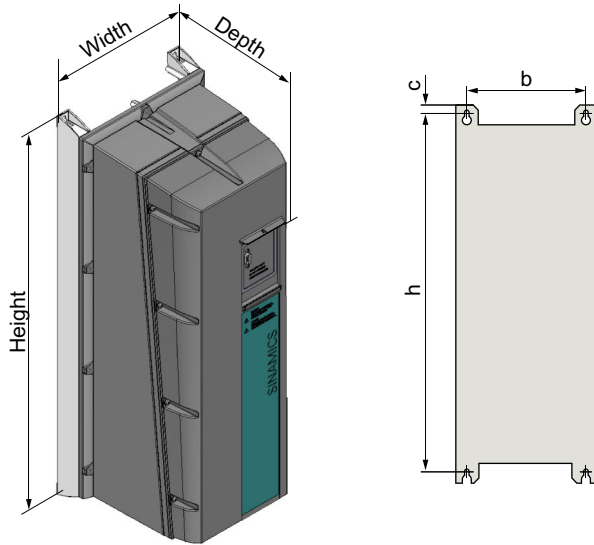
Dimension drawing, PM230 Power Module IP55, FSA ... FSC
